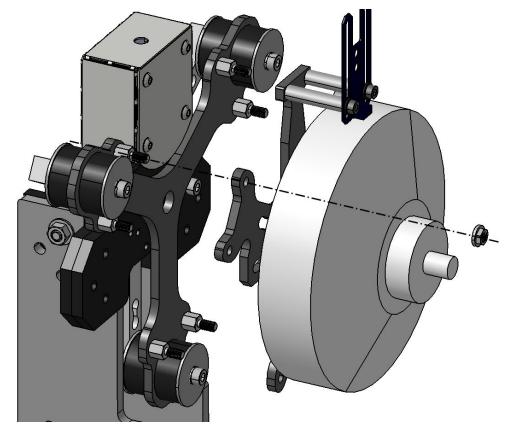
Connection of load measurement unit with motor mount assembly using M5 nuts
